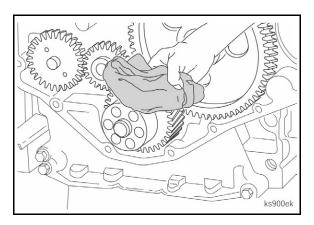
MAKE SURE THE CRANKSHAFT IS CLEAN AND DRY
